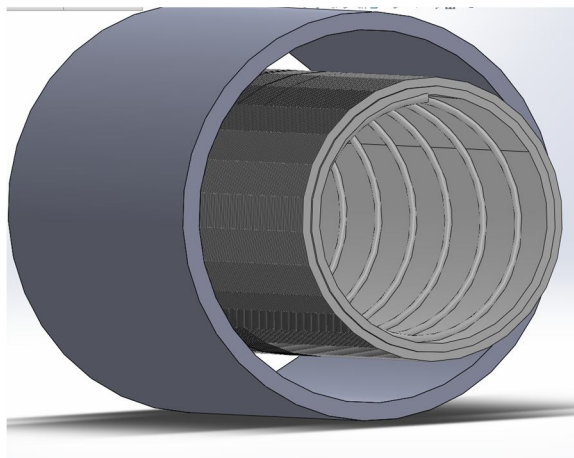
Elaborated view of copper tube with fins and internal ribs
